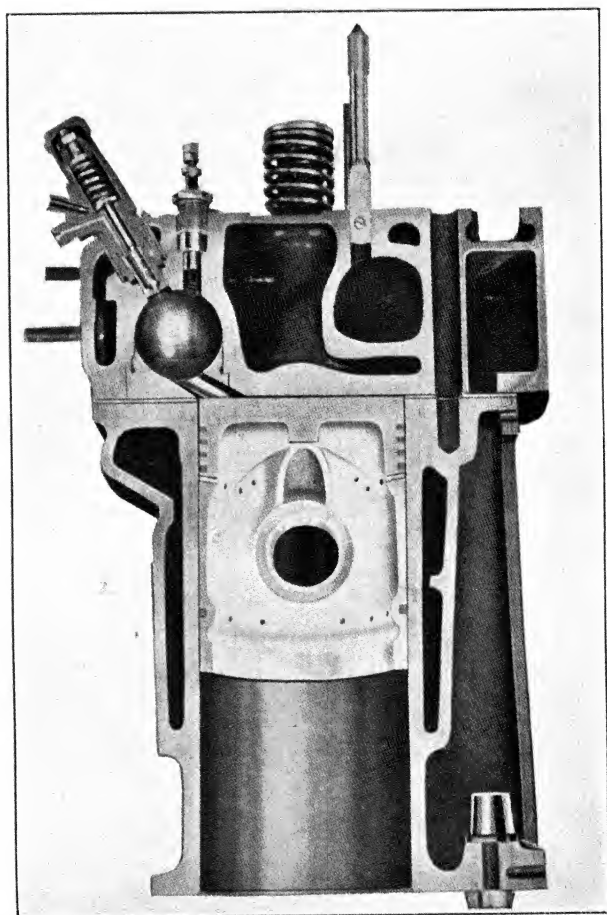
SECTION THROUGH CYLINDER HEAD OF A.E.C.-RICARDO ENGINE.
